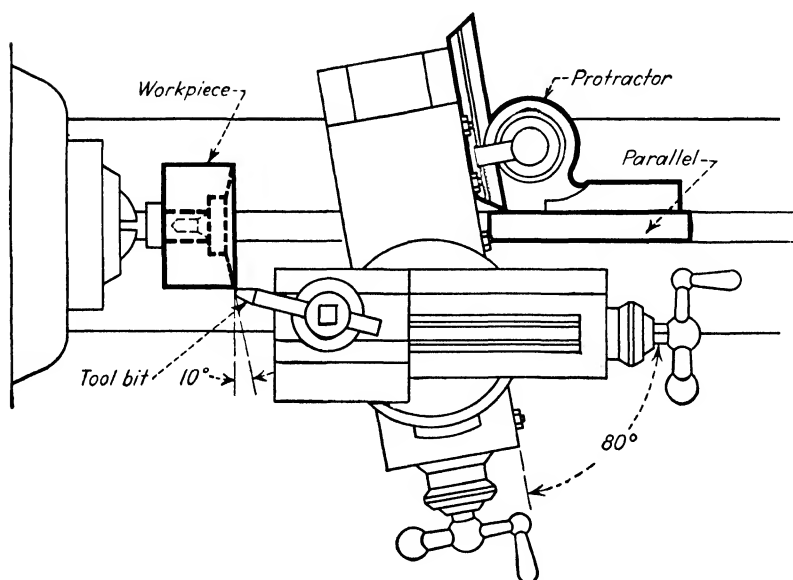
A protractor checks setting for a 10-deg concave surface.
